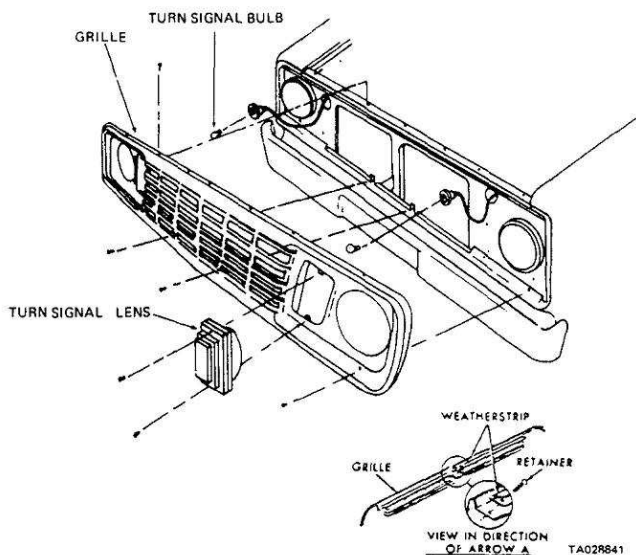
Grille Assembly (Models Manufactured After August 15, 1976).
